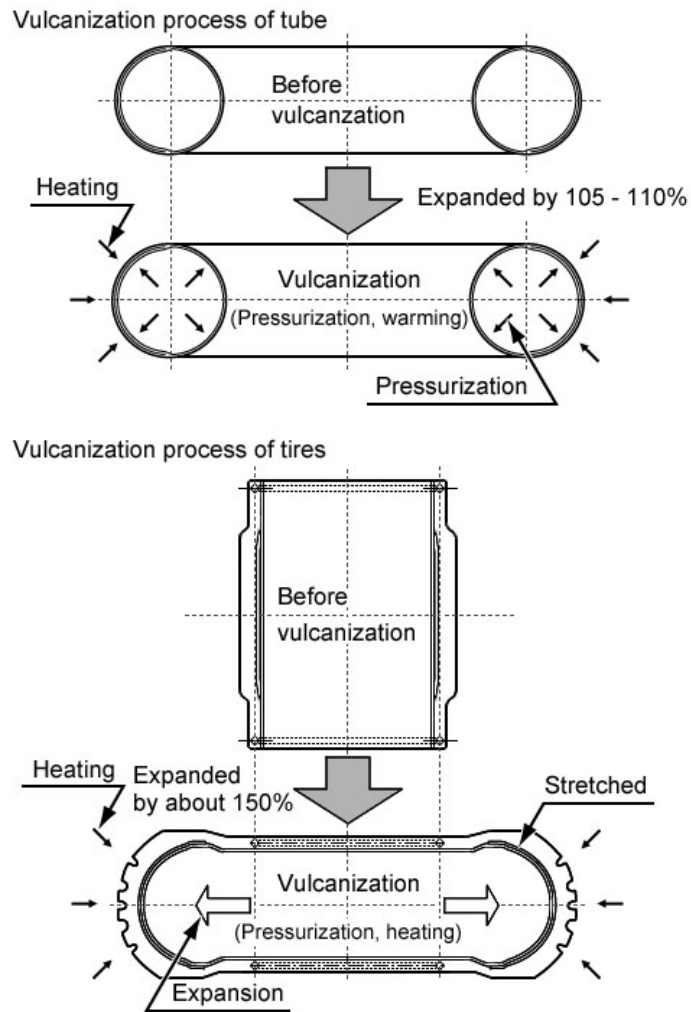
Vulcanizing process for developed double-chamber tubeless tire
